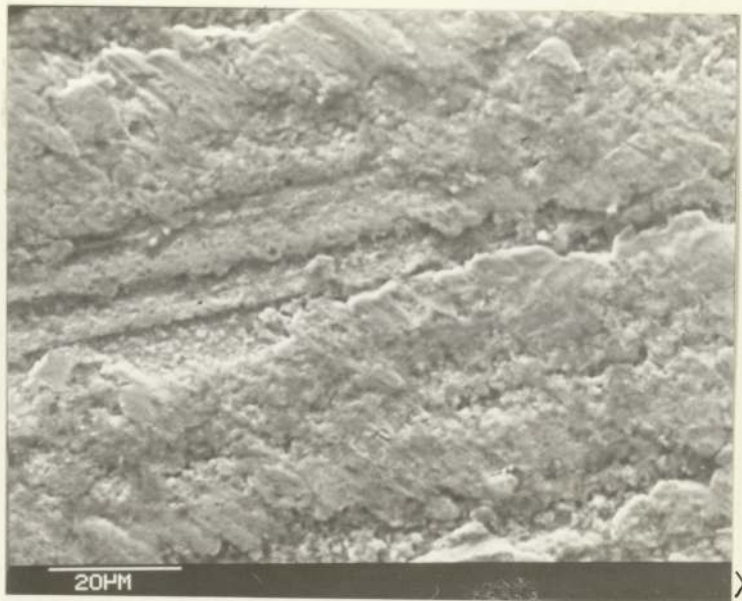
A view of the as-forged surface of a hardened and tempered BH13 die after 100 cycles hot forging showing cracks and a dislodged wear platelet.
